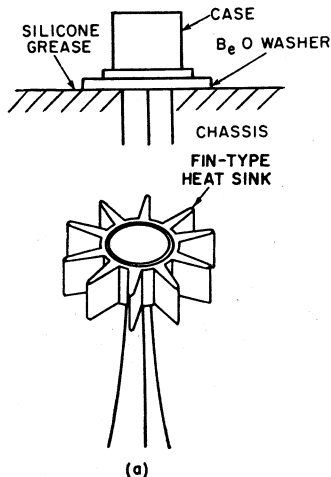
Suggested mounting arrangements for transistors in JEDEC TO-5 package.
